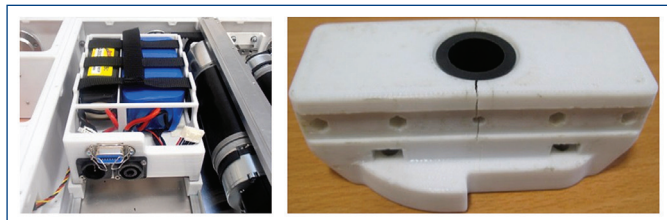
Left – implementation of the driving unit and a battery box in the mobile robot Kraken, right – damage of the part by an incorrectly placed plain bearing
